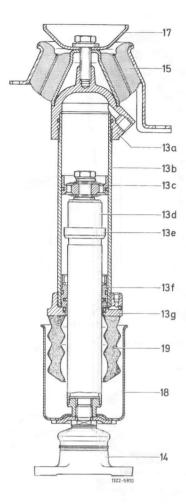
Gas pressure shock for front axle Upper end cover 13b Cylinder 13c Damper piston Piston rod Collar of piston rod 13d 13e Piston rod guide Lower end cover Ball joint Rubber mount Rebound stop 15 18 Stop cup Stop buffer
